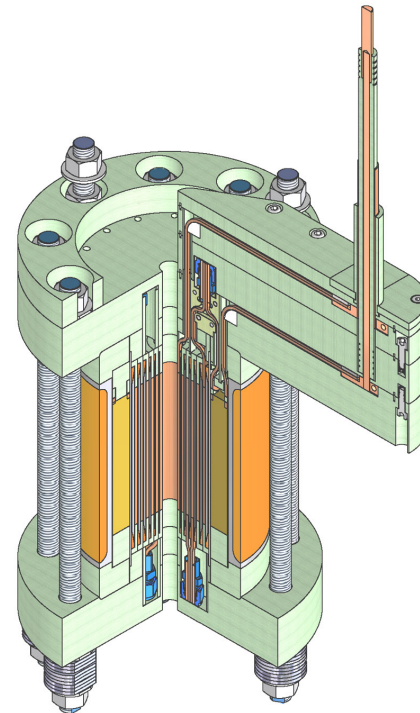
Cutaway view of 65 T magnet assemblies illustrating the two coil nested coil geometry and coaxial lead structure.
